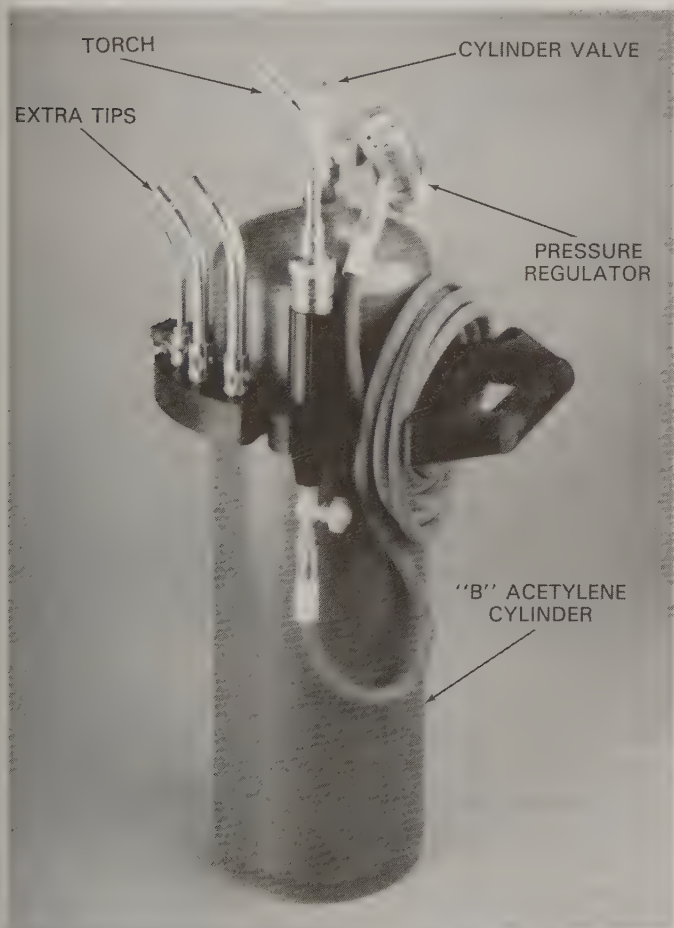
A typical air-acetylene torch outfit for soldering is used with a "B" cylinder. All acetylene cylinders must be tested and approved for use. (Thermodyne)
